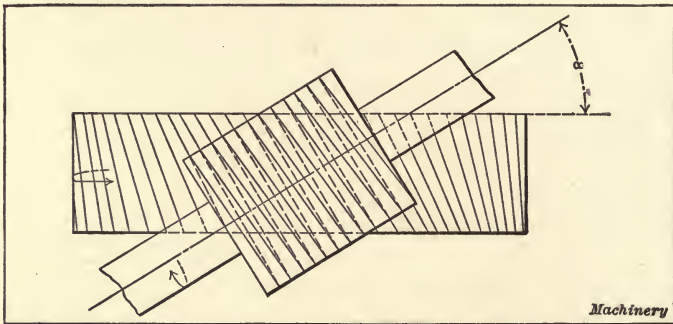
Cutting a Left-hand Spiral Gear with a Right-hand Hob
